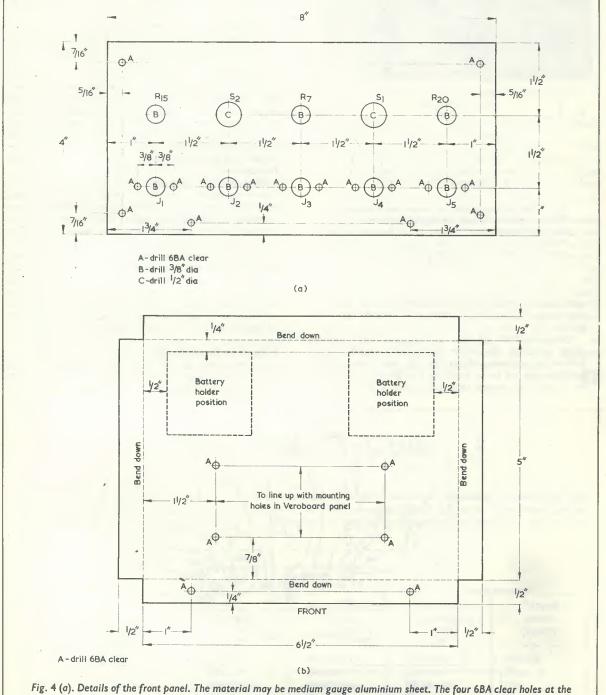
(a). Details of the front panel. The material may be medium gauge aluminium sheet. The four 6BA clear holes at the corners are intended for mounting the unit in a cabinet (b). The main chassis. This may employ the same gauge of aluminium sheet as is used for the panel
